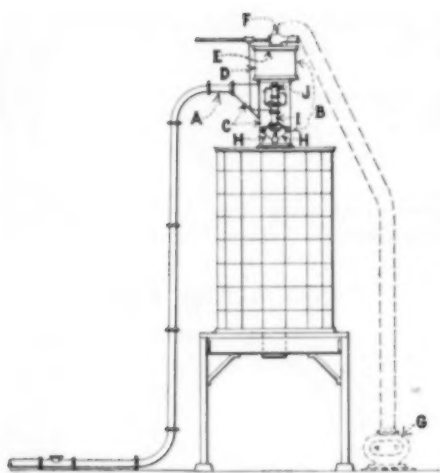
An Outline Drawing of Pneumatic Conveyor and Operating Head
